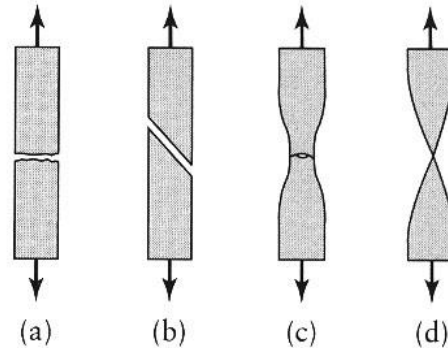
Schematic illustration of the types of fracture in tension: (a) brittle fracture in polycrystalline metals; (b) shear fracture in ductile single crystals (see also Fig. 3.4a); (c) ductile cup-and-cone fracture in polycrystalline metals (see also Fig. 2.2); (d) complete ductile fracture in polycrystalline metals, with 100% reduction of area.
